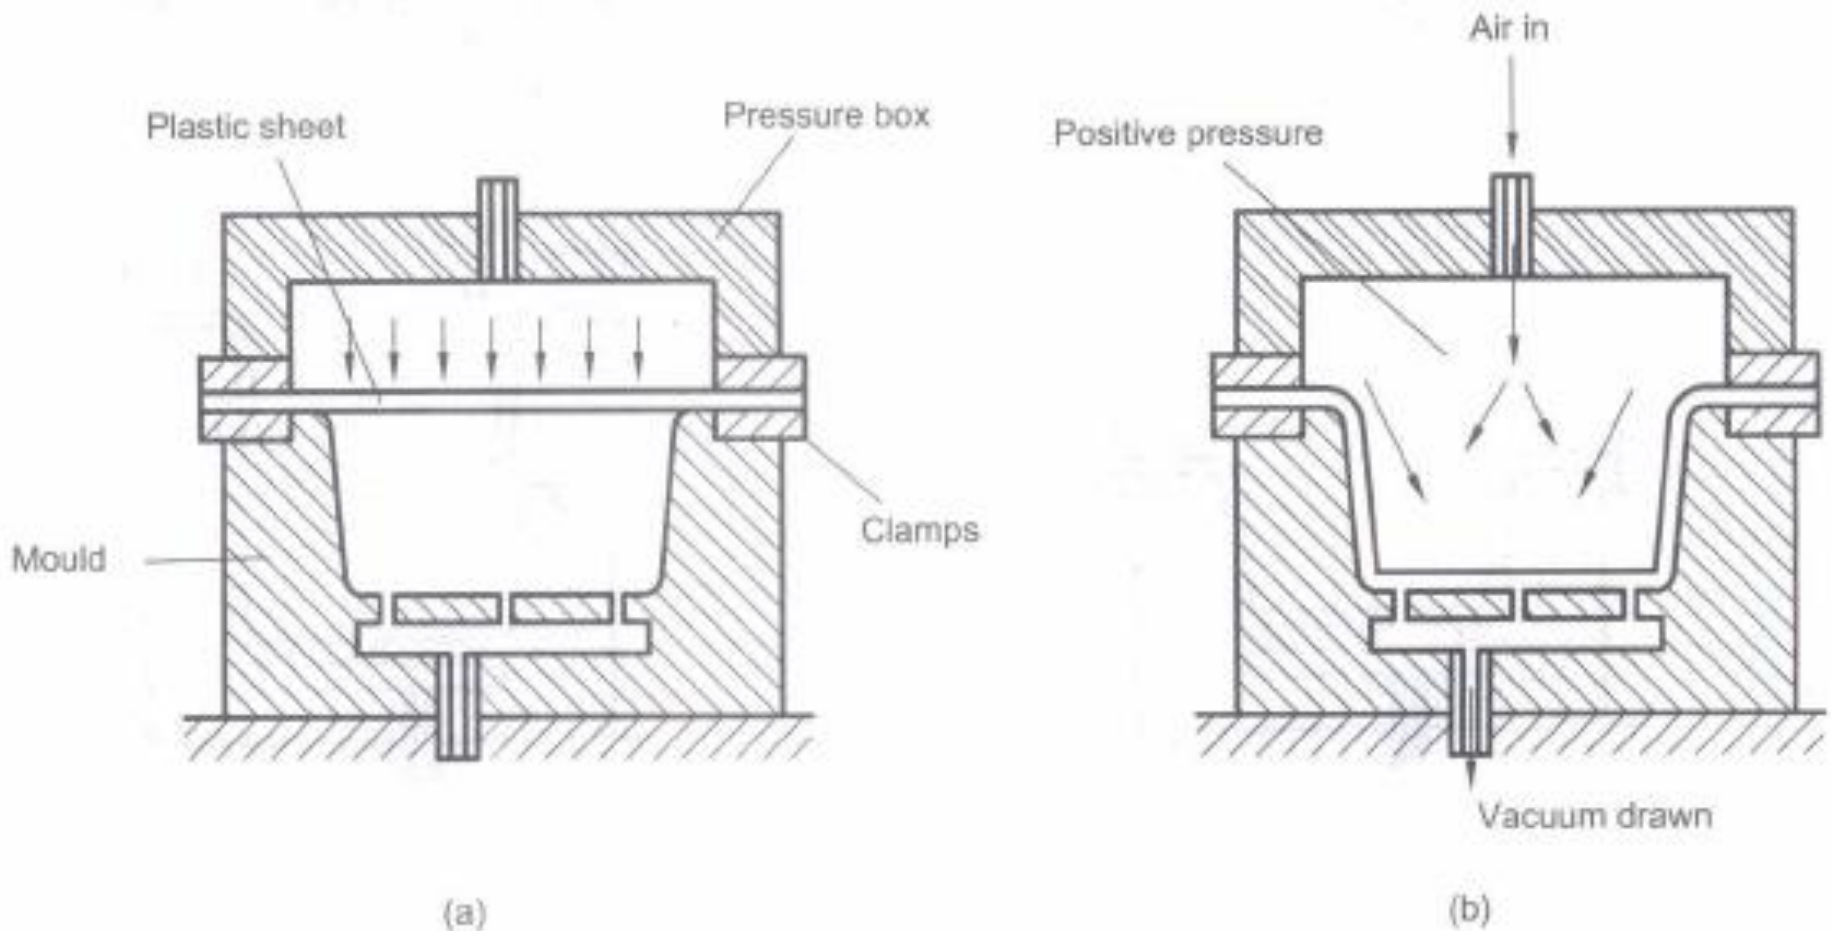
Steps in pressure thermoforming process: (a) Plastic sheet is clamped in a frame, attached to the mould and heated. (b) Pressure applied on the top forces the plate to follow the contour of the mould. Vacuum is applied from the bottom to assist the forming process.
